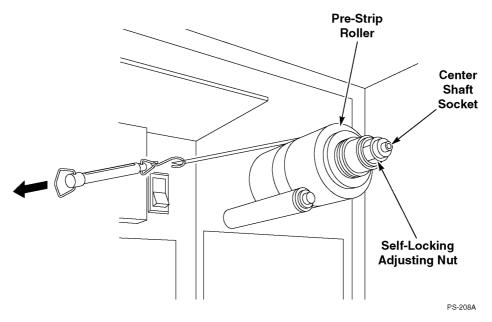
Pre-Strip Roller Tension Adjustment (Left-Hand Applicator Shown)
